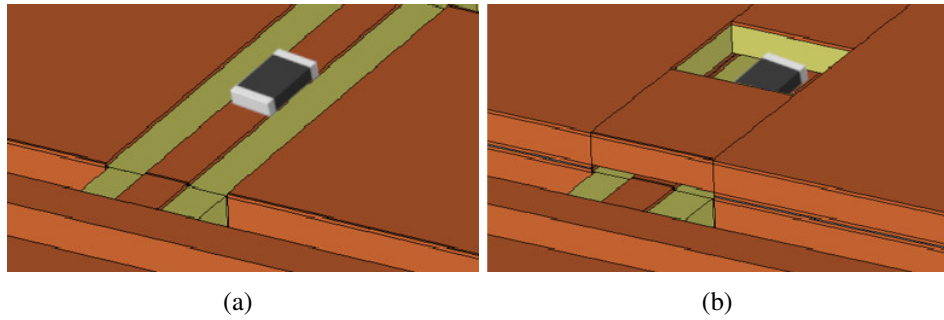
Detail view of the surface-mount resistor: (a) Top view of the third layer and (b) top view of the assembled device without the top cover.
